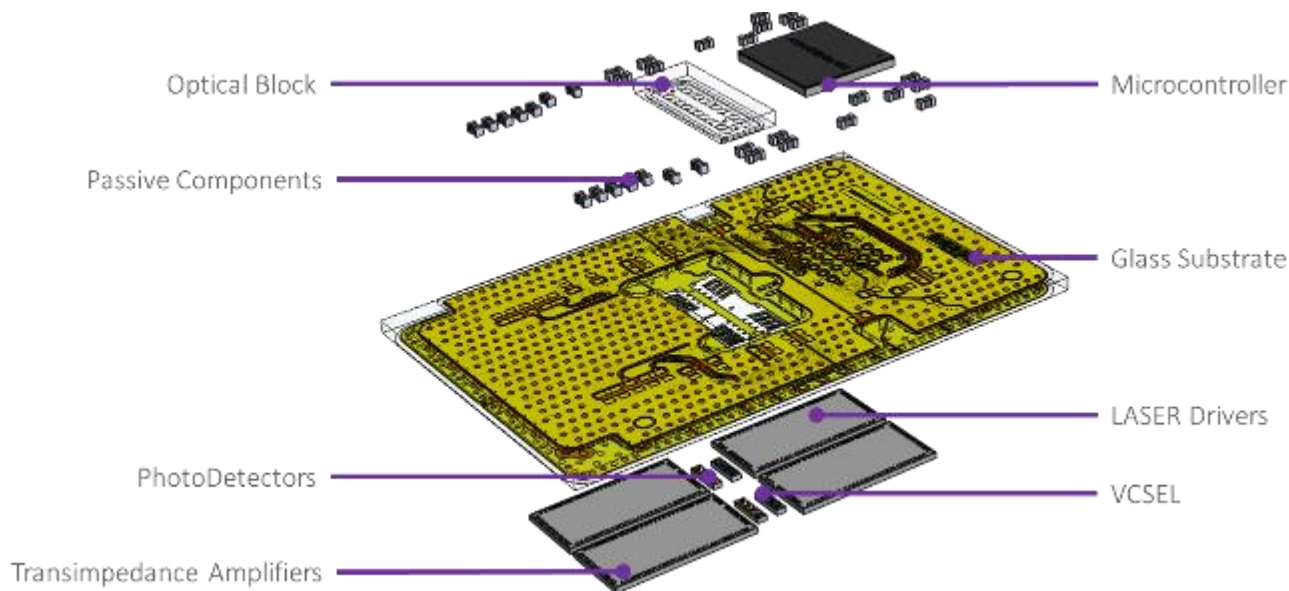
Exploded CAD view of the Components Attached to the Glass Interposer
